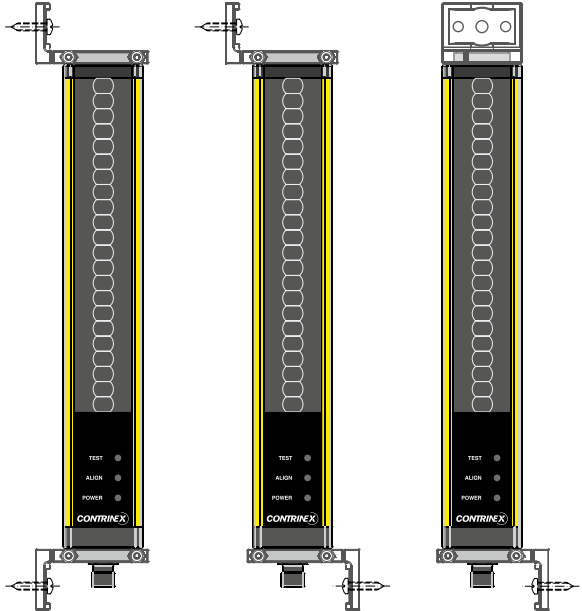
DIFFERENT MOUNTING POSSIBILITIES WITH BRACKETS
